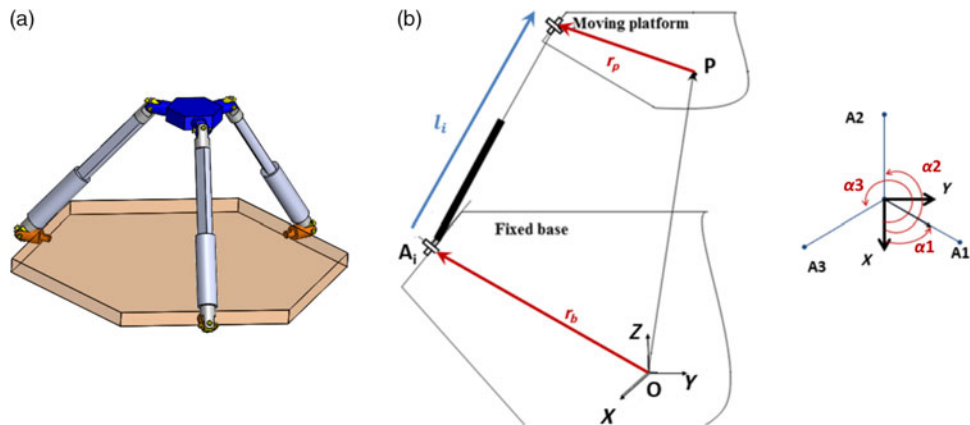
The 3-UPU robot: (a) CAD model and (b) parameters of one leg.
